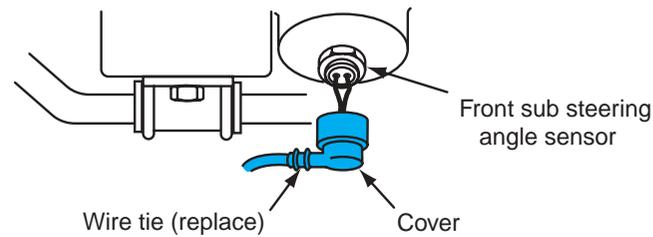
Cutting the tie strap and removing the front sub steering angle sensor cover.
